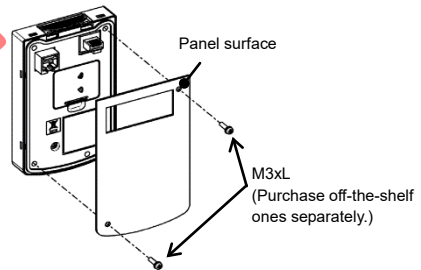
(b) Keypad installation (when reusing panel cutout for previous product)
